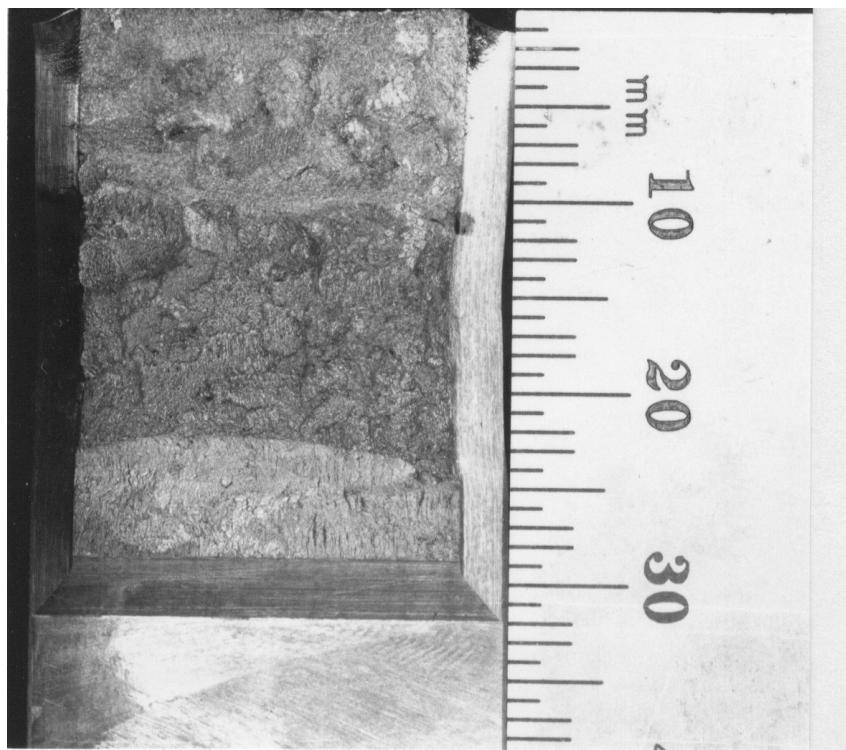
Fracture surface of service-aged CA4 material from the cold-leg check valve aged further for 10,000 h at 400°C and tested at 25°C
